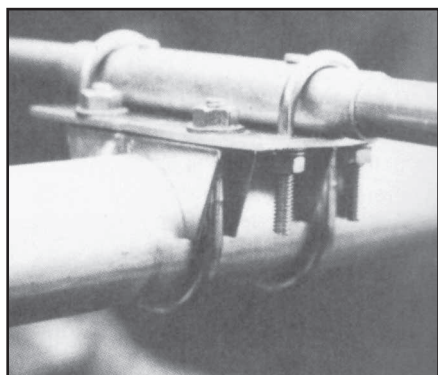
The element-to-boom clamp. Galvanized U bolts are used to hold the element to the plate, and 2-inch galvanized muffler clamps hold the plates to the boom.
